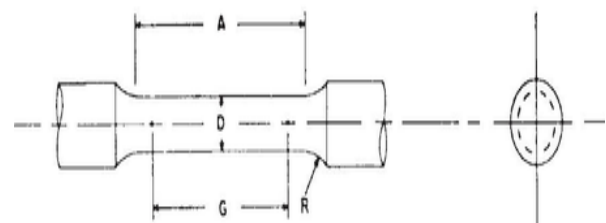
Round tensile specimen drawing [ASTM E 8 M]
